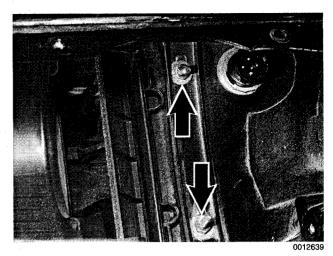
Heater core mounting nuts at left side of bulkhead (arrow). Wiper assembly shown removed for clarity.
